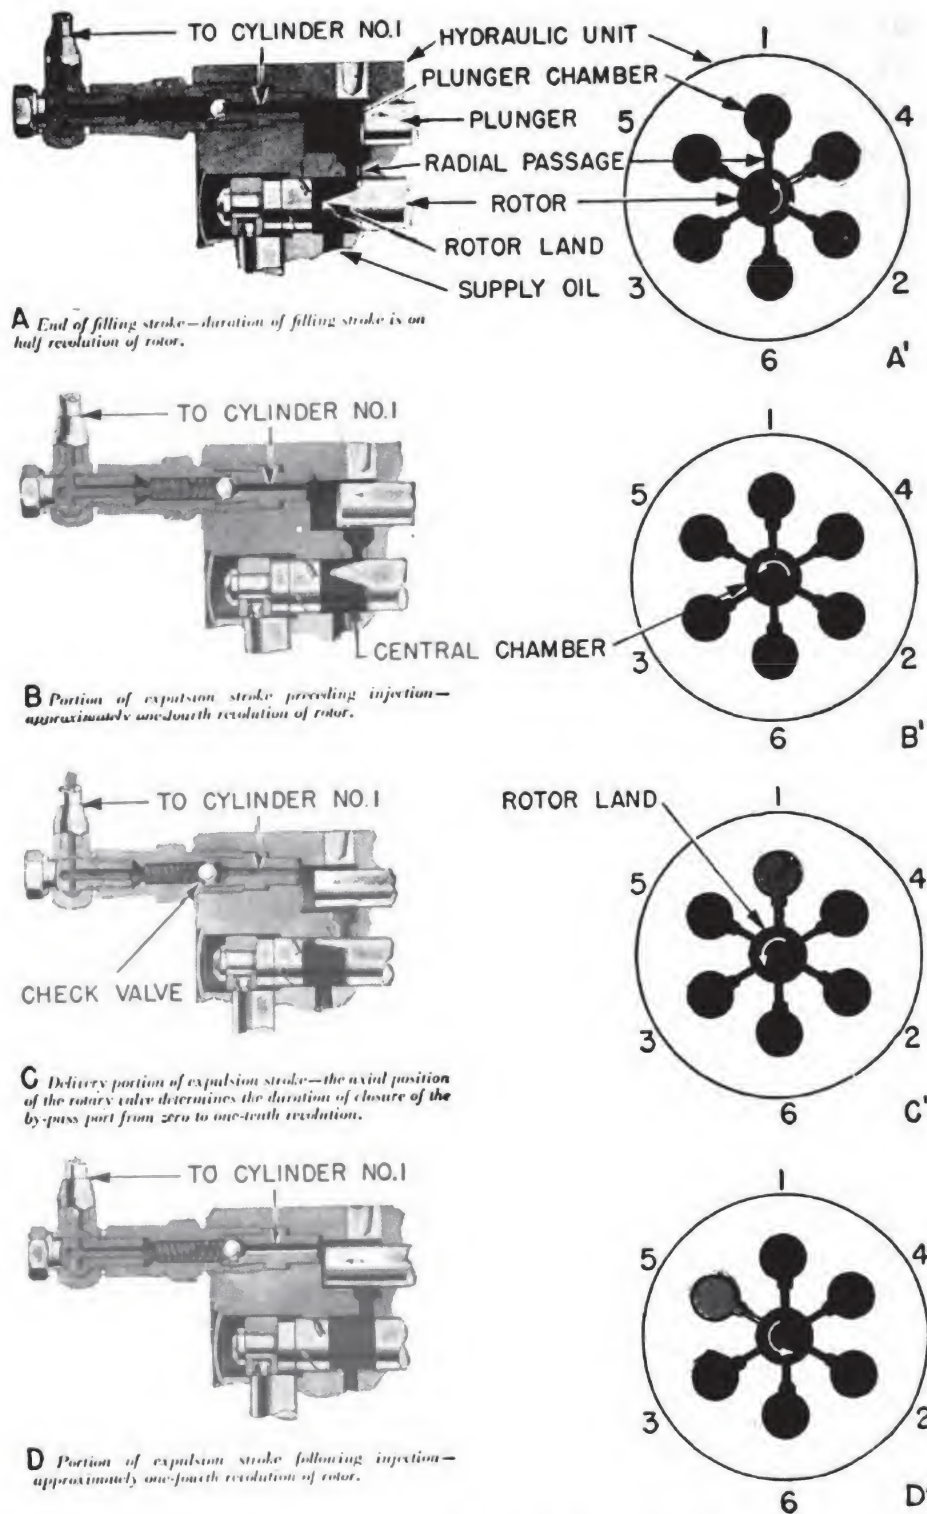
Mechanism of the Ex-Cell-O fuel injection pumps.
